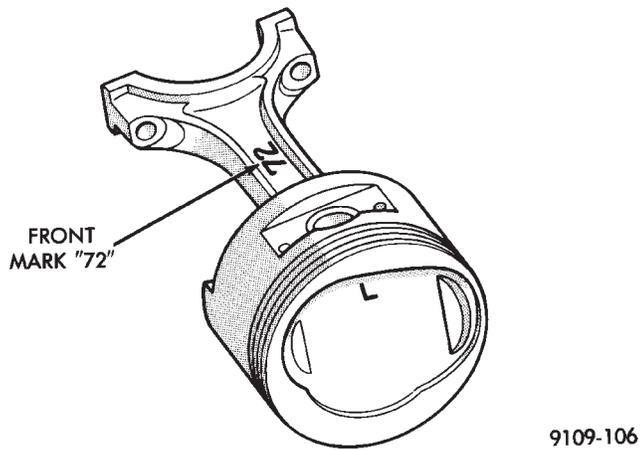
Identify Piston/Rod Assembly for Cylinder Installation
